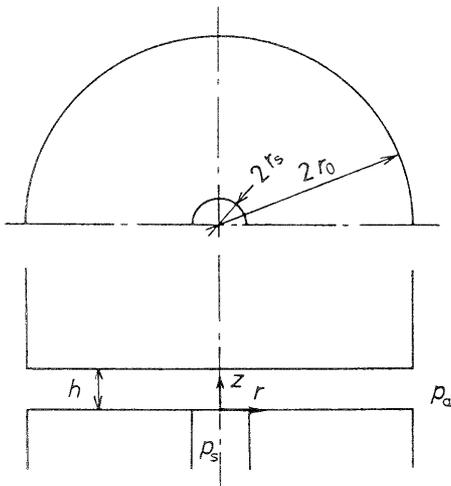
Schematic view of externally pressurized thrust bearing with a single central supply hole
